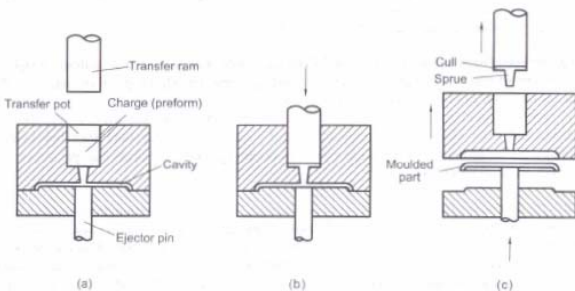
Steps in transfer moulding for thermosetting materials
